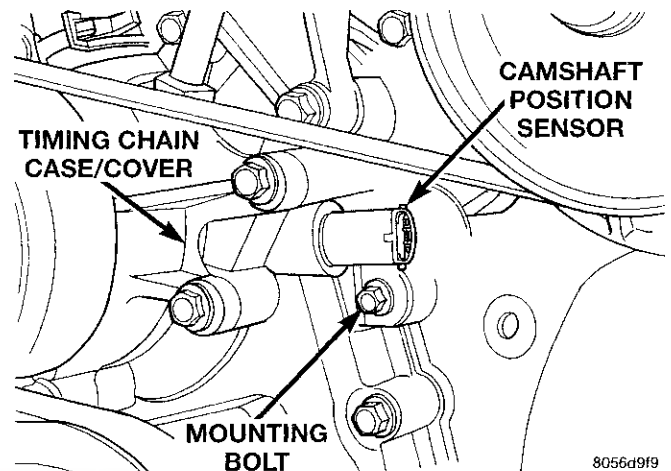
Camshaft Position Sensor—8.0L V-10 Engine
